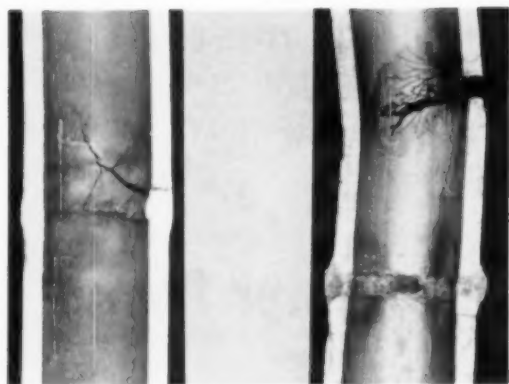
Boiler tubes damaged by alkaline infiltration—Left: tube from power plant boiler, Right: tube from experimental boiler.
